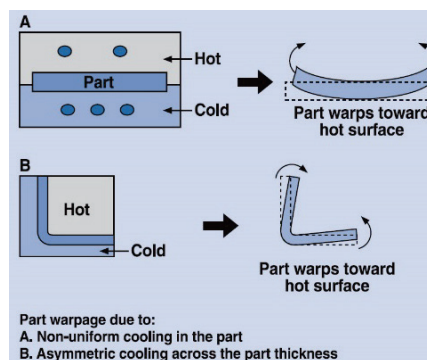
Moulded part warpage due to uneven mould temperature field [7]
